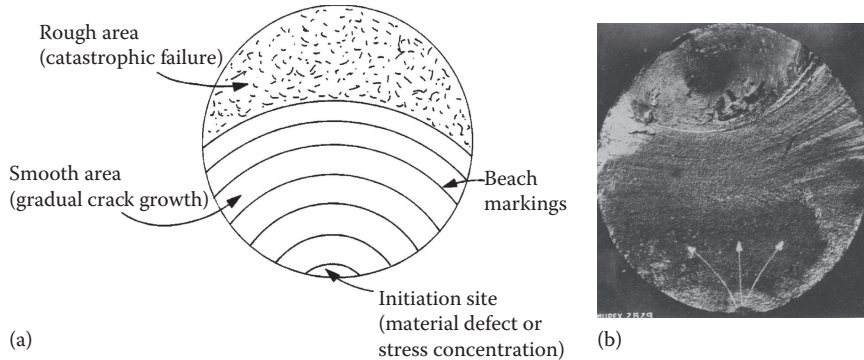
General appearance of a fatigue fracture surface. (a) Schematic representation; (b) fatigue fracture of automobile axle shaft. (From Rollason, E.C., *Metallurgy for Engineers*, 4th edn., Edward Arnold, London, U.K., 1977.)
